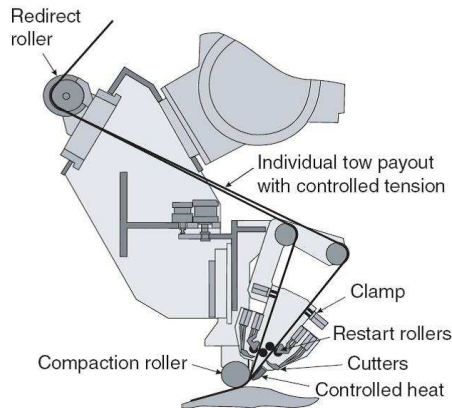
Schematic view of an AFP machine head (Evans, 2001)
